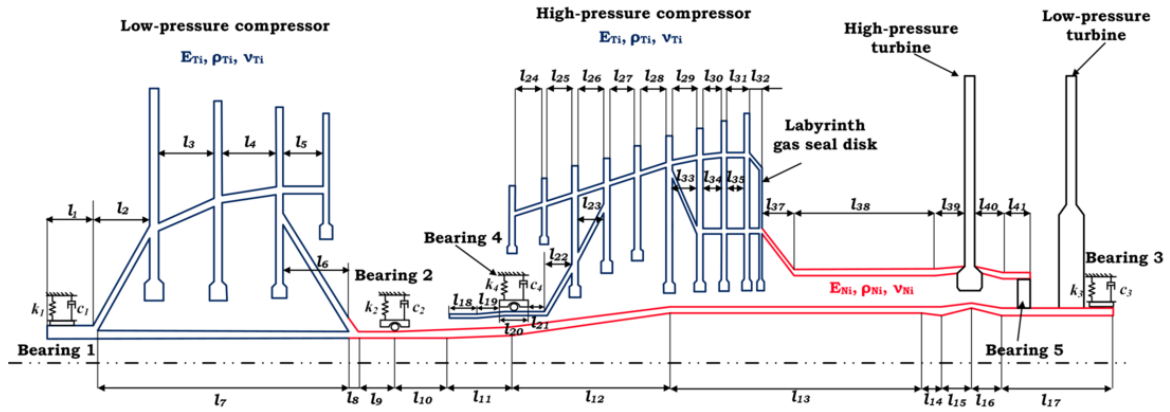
The sectional view of the aero-engine dual-rotor model, which is made up of cylindrical and conical shaft sections, rigid disks, and rolling contact bearings (Jin et al. (2019)).
